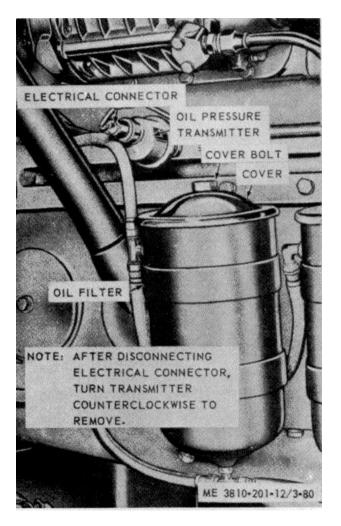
Lubricating oil pressure transmitter removal and installation.
